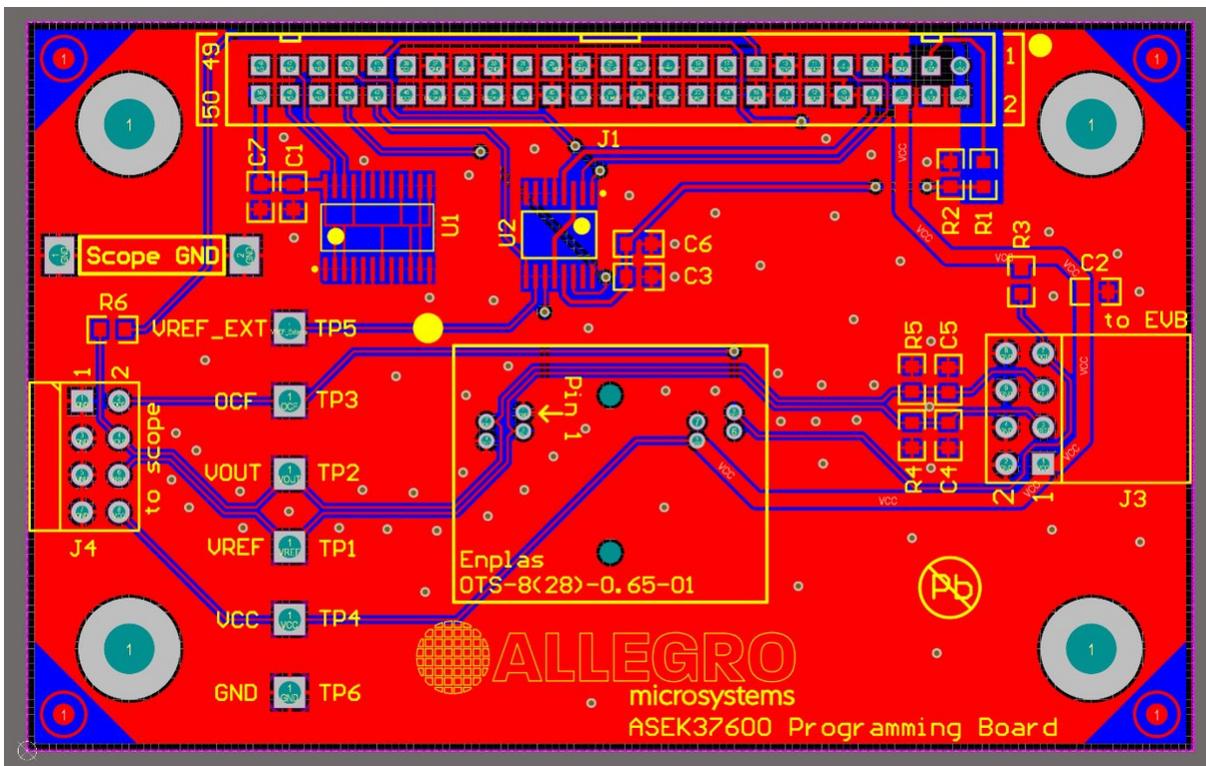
ASEK37600 Programming Board PCB Layout – Top View
